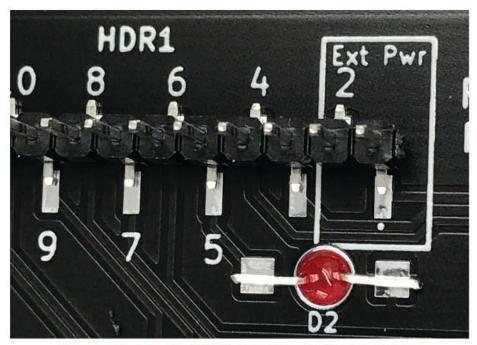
Close up of an SMT .1" pin header and LED before soldering.
